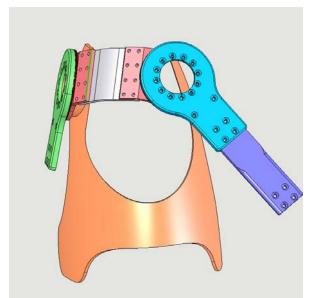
The bearing assembly elements are two flat, thin bearings and the cross-strut that joins them. This configuration is for a right shoulder. The left bearing is affixed to the frame and is the abduction joint, while the right bearing is for flexion.
